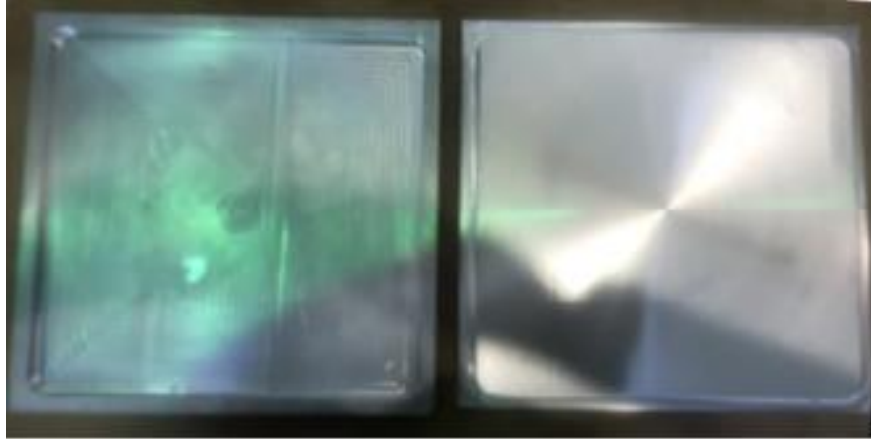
Bottom (left) and top (right) part of a closed mold made of aluminum. The area of the mold cavity is 280 mm x 280 mm
